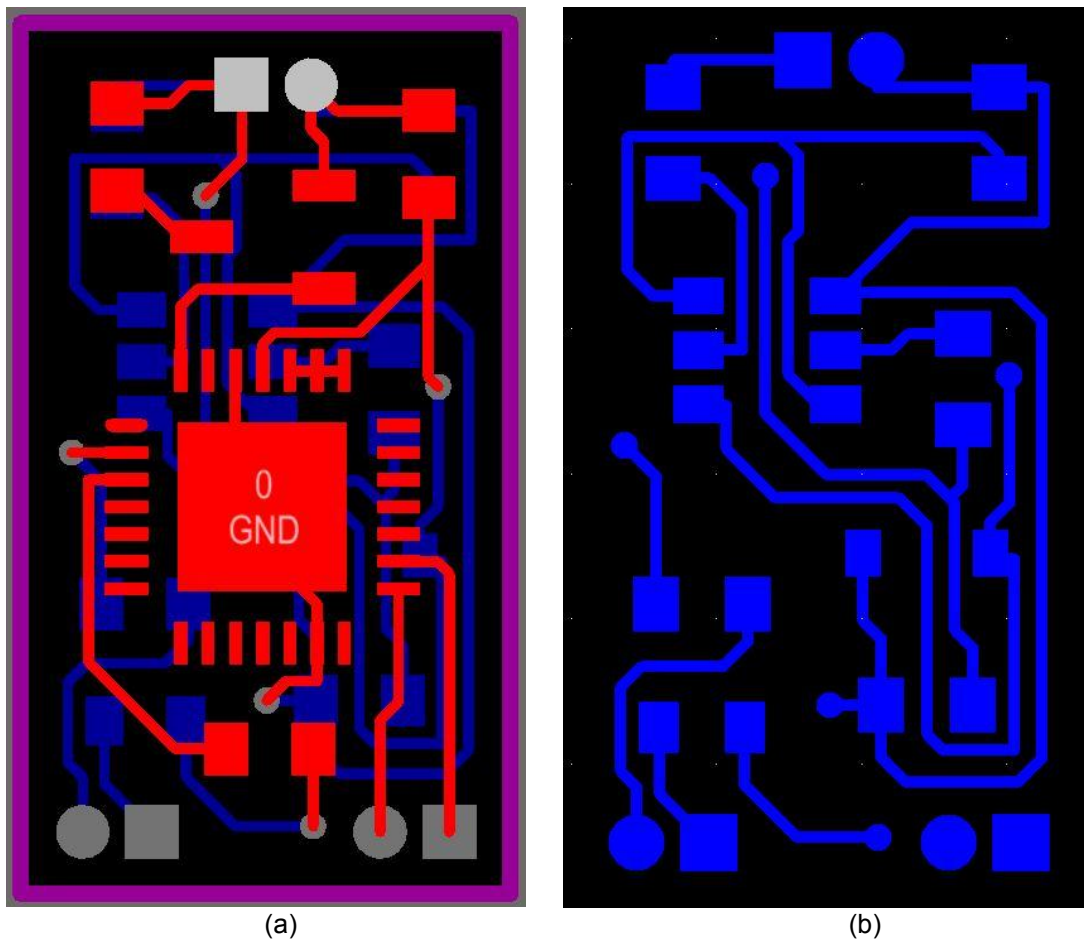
PCB layout for the schematic in Figure 7.1. A view of the top layer (a) and the bottom layer (b) seen from the top.
